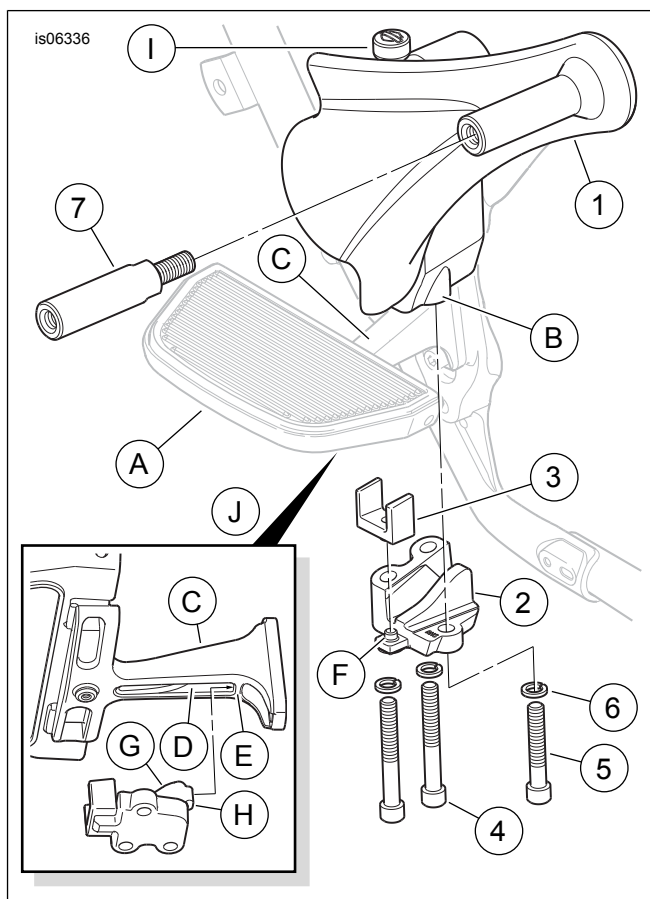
Service Parts, Adjustable Auxiliary Passenger Footpeg Mount Kit (Right Side Shown)
